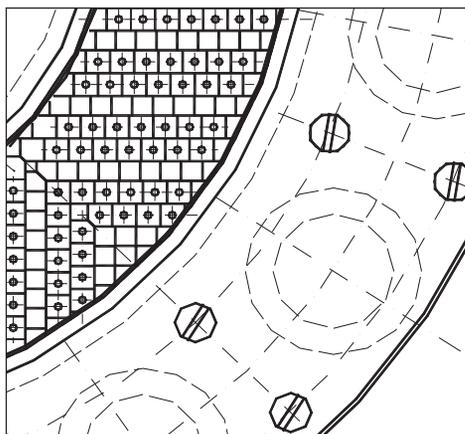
Scheme of the part of a die for polyethylene granulation with cutting surface made of WC-Co sinters plates brazed to the face of a die body; working plates (with a hole), distanced plates (without a hole)
